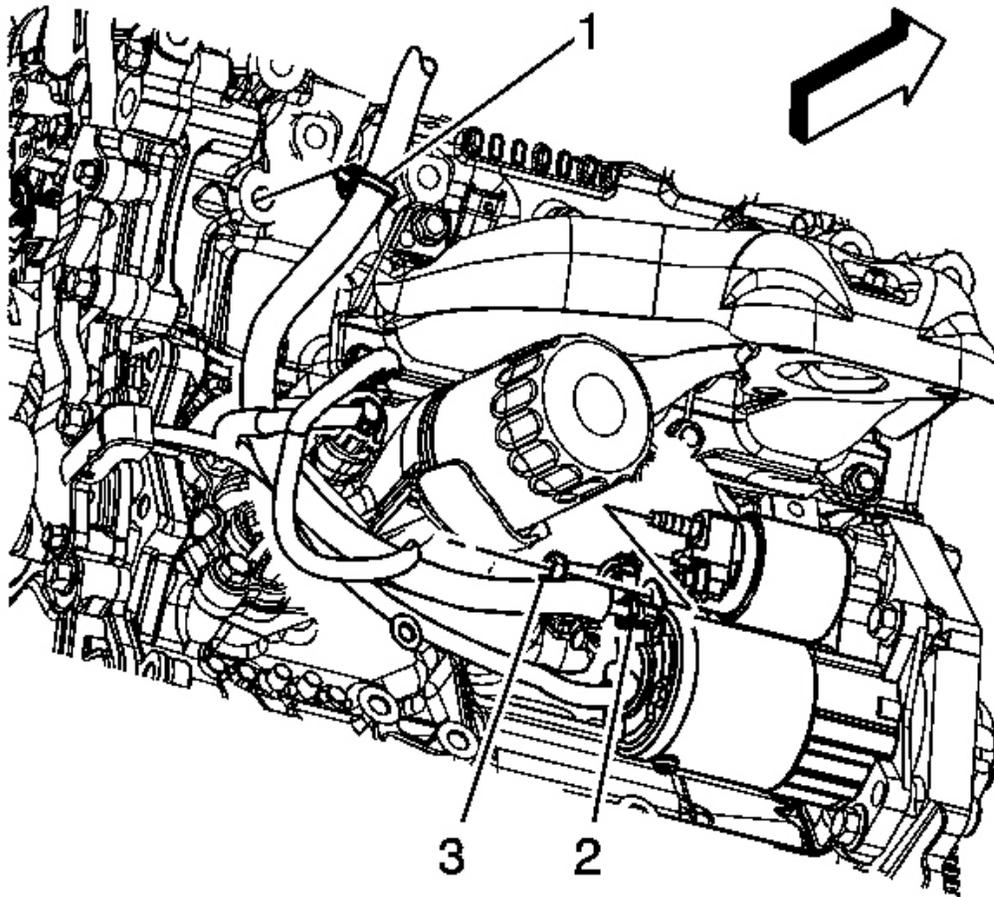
Identifying Battery Positive Junction Block Cable Boot & Cable Terminal
